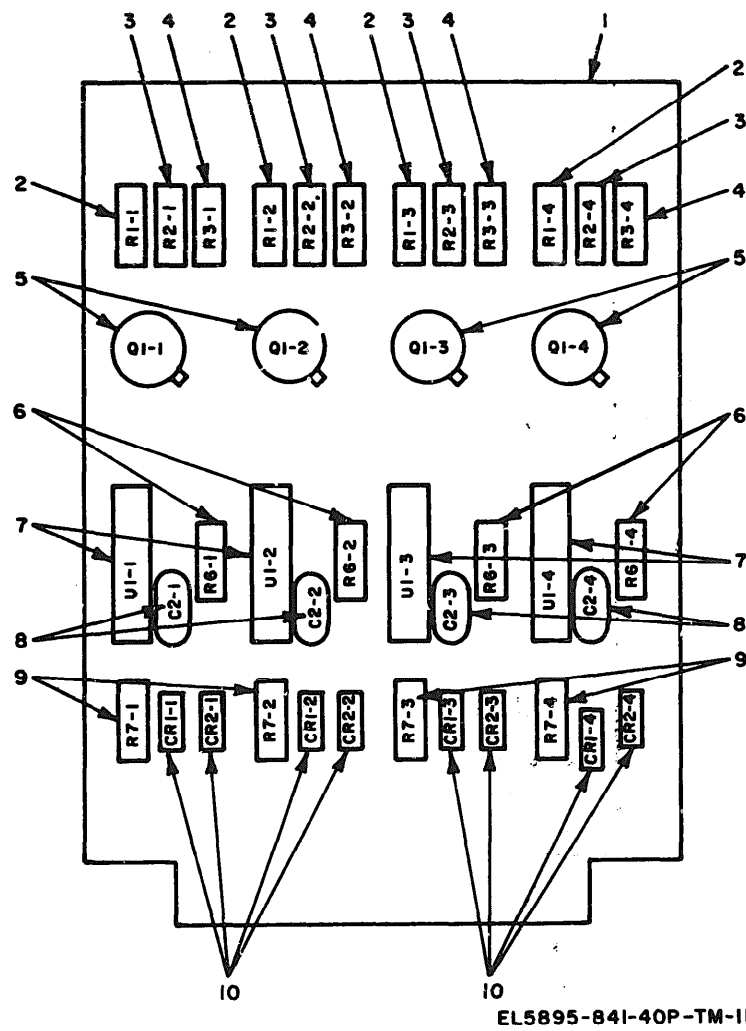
Circuit Card Assembly (2XRD transmitter) 398-6542-4.
